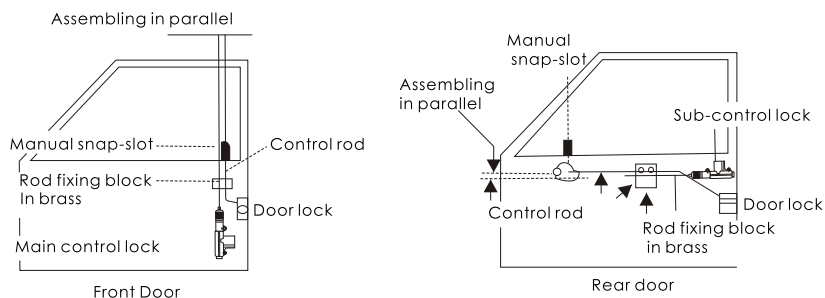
ASSEMBLING INSTALLATION ILLUSTRATION OF CONTROL LOCKS
